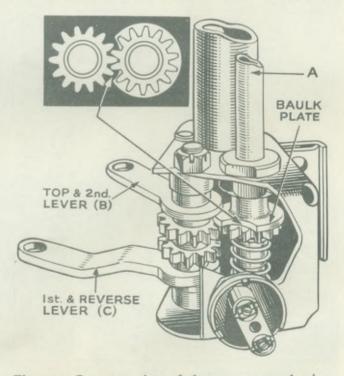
Cut away view of change gear mechanism showing top gear engaged position. Inset shows neutral position of gear
